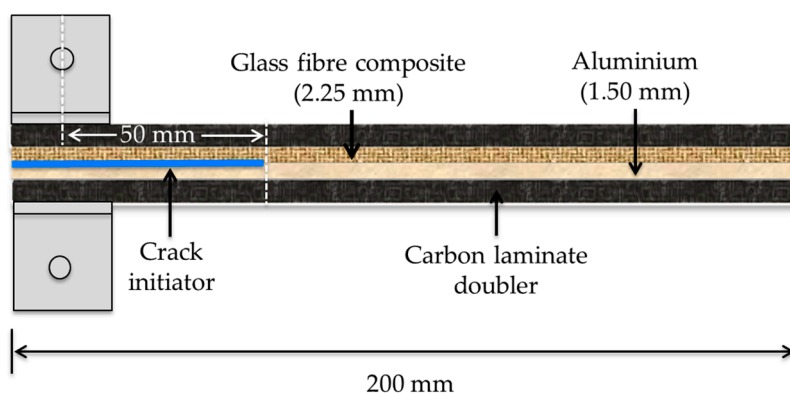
Geometry and dimensions of the Double Cantilever Beam (DCB) specimens used for measuring the fracture toughness properties.
